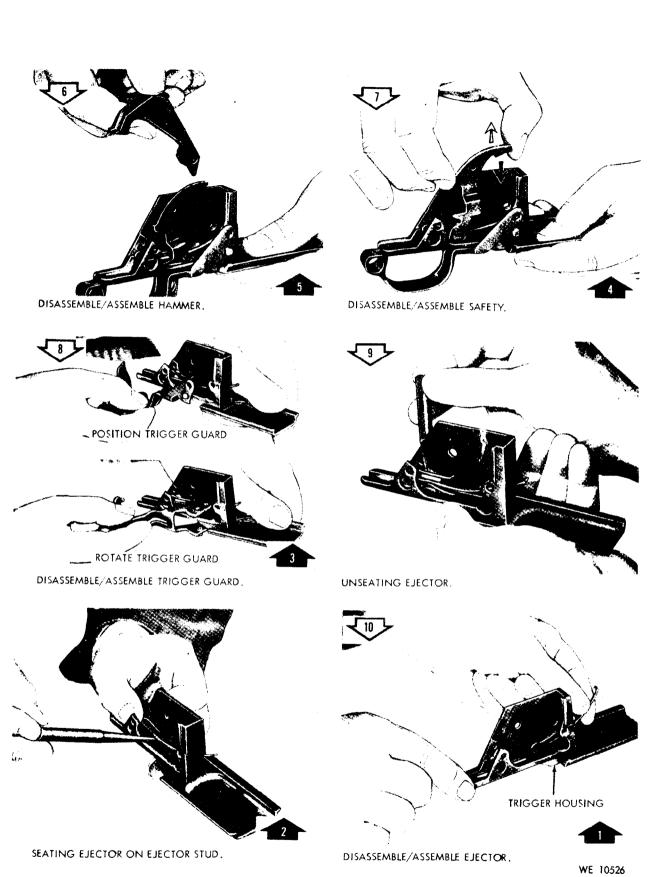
Disassembly/assembly of trigger housing assembly. (2 of 2)
